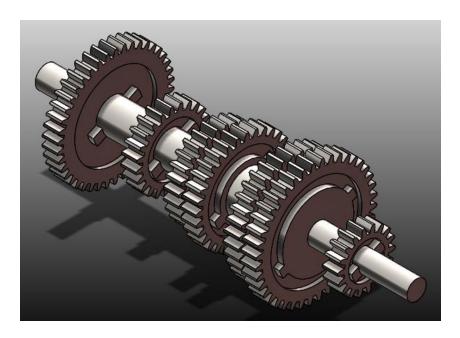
, Layshaft and Layshaft Gears Sub-assembly
